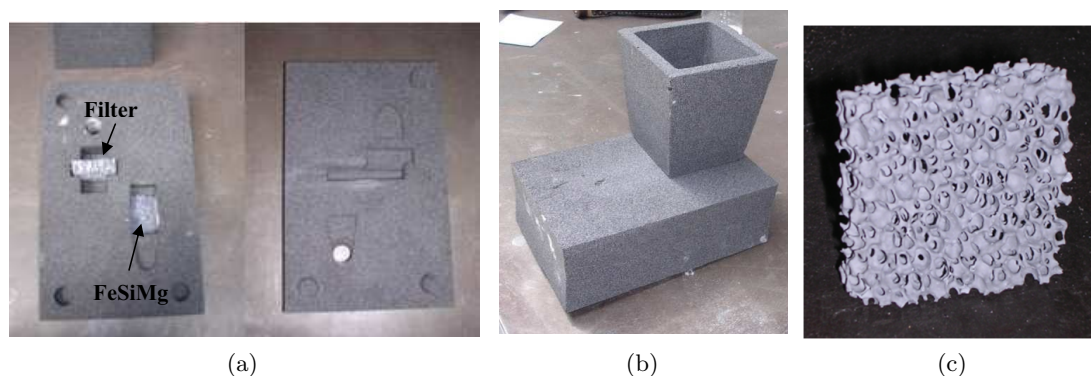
(a) Schematic representation of tundish ladle assembly, (b) Tundish ladle apparatus for spheroidization, and (c) Filter used in the tundish ladle assembly.
